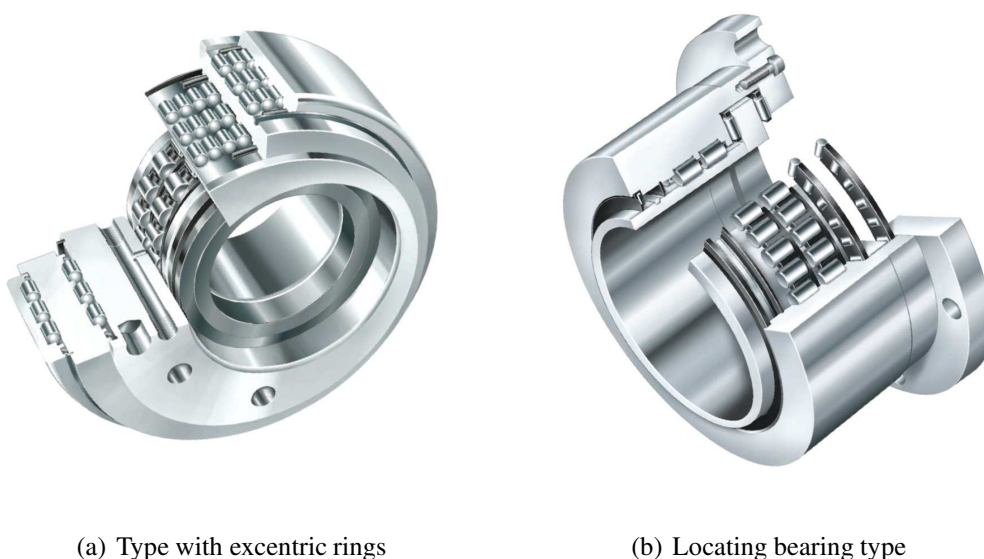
Two examples of roller bearings for printing machines from the company FAG [99]
